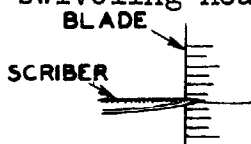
ADJUSTING SCRIBER TO DESIRED DIMENSION
